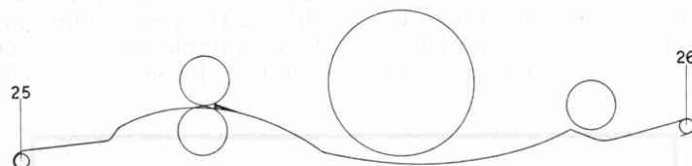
This drawing is exactly half-size and will be useful when shaping the two guide strips for the model.
